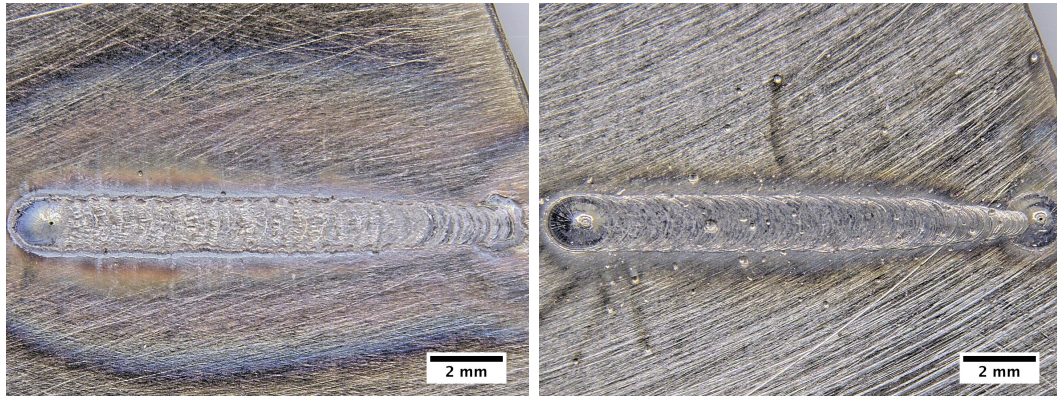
Optical micrograph showing the traverse laser weld incident surface (left) and exit surface (right) in the B154Y-2 alloy. Optical inspection shows no cracking or surface defects in the specimen.
